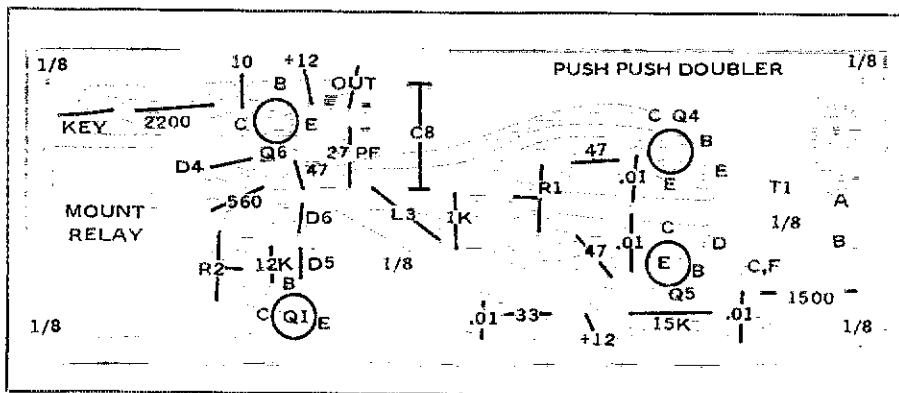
Scale layout and parts placement for the doubler/break-in delay board. View is from the component side of the board. Etching patterns for all circuit boards in this series will be published with Part 3; 1/8 indicates a 1/8-inch hole.
